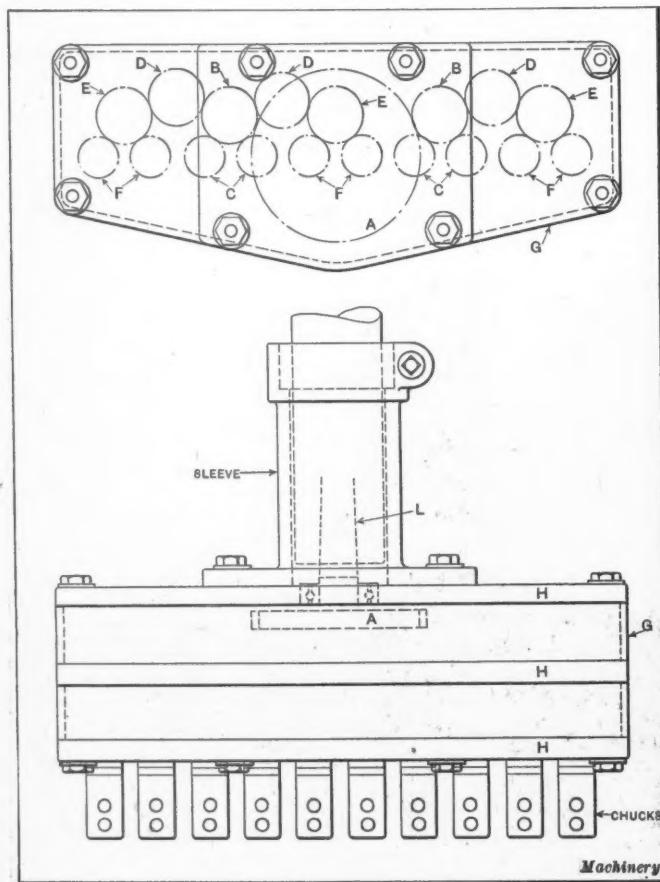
Ten-spindle, Straight-line, Gear-driven Drill Head
